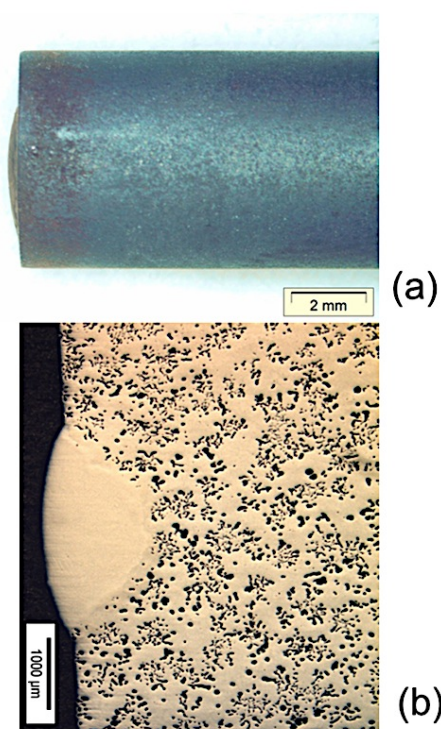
(a) End of the cylindrical specimen covered with a stainless-steel cap by fusion welding. (b) Microstructure of the end of the specimen is not significantly affected by the fusion welding.
